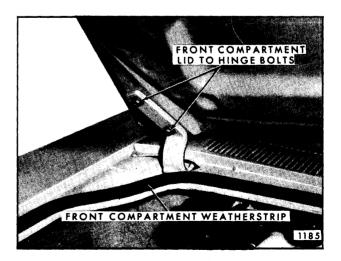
Front Compartment Weather Strip and Lid to Hinge Bolts
